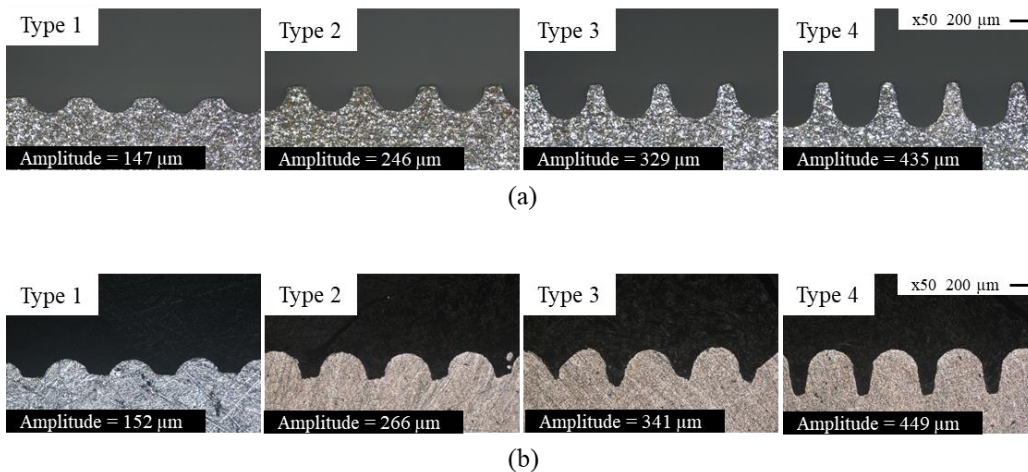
Optical microscopy images showing cross sections of (a) imprinting molds and (b) imprinted Al plates
